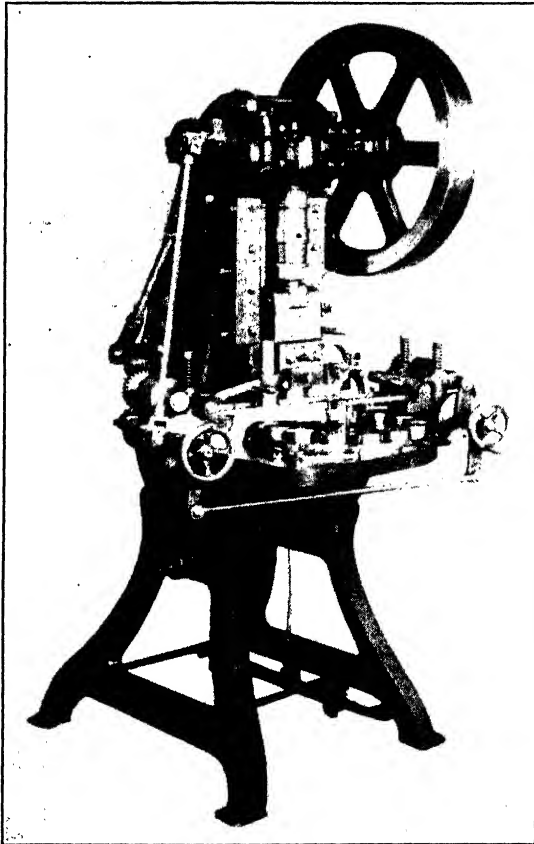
A C-frame press with roll feed for strip material and dial feed for drawn parts, for a series of operations.
